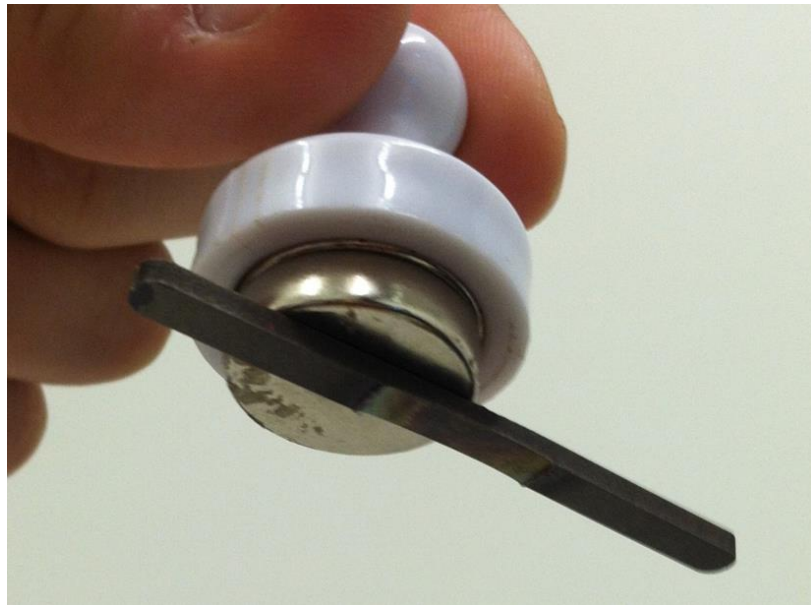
Weld containing the iron streak is attracted by a magnet.
